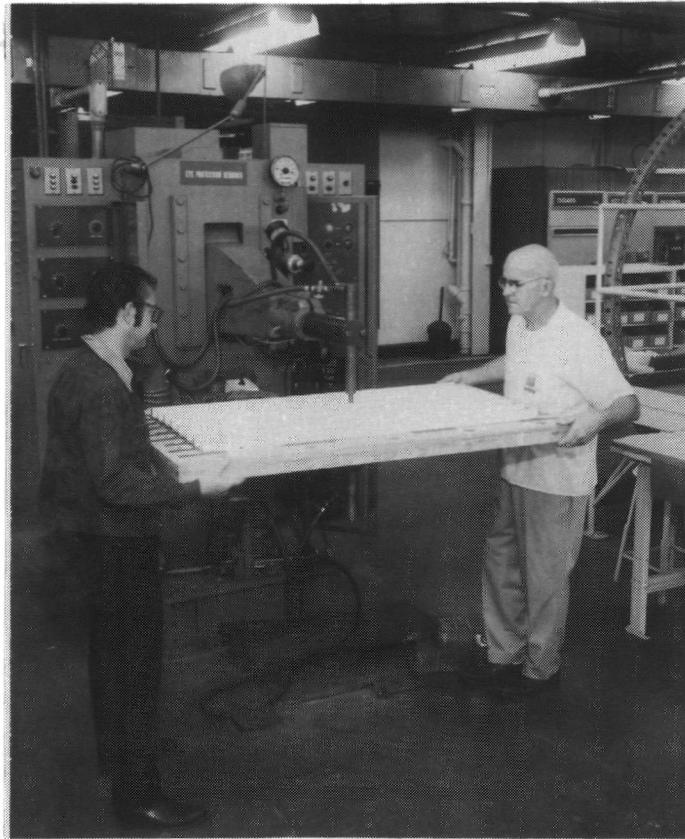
B/Al Compression Panel Weld Setup.
